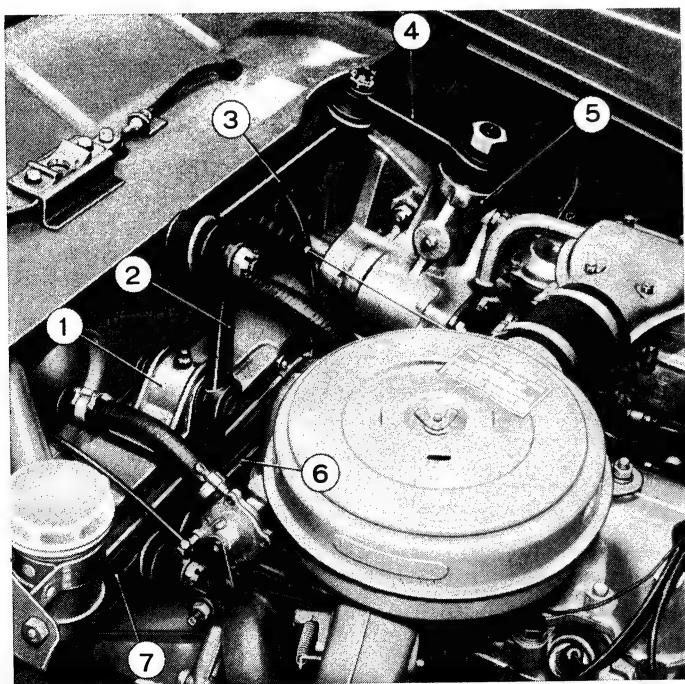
Arrangement of steering gear and linkage on vehicle.
